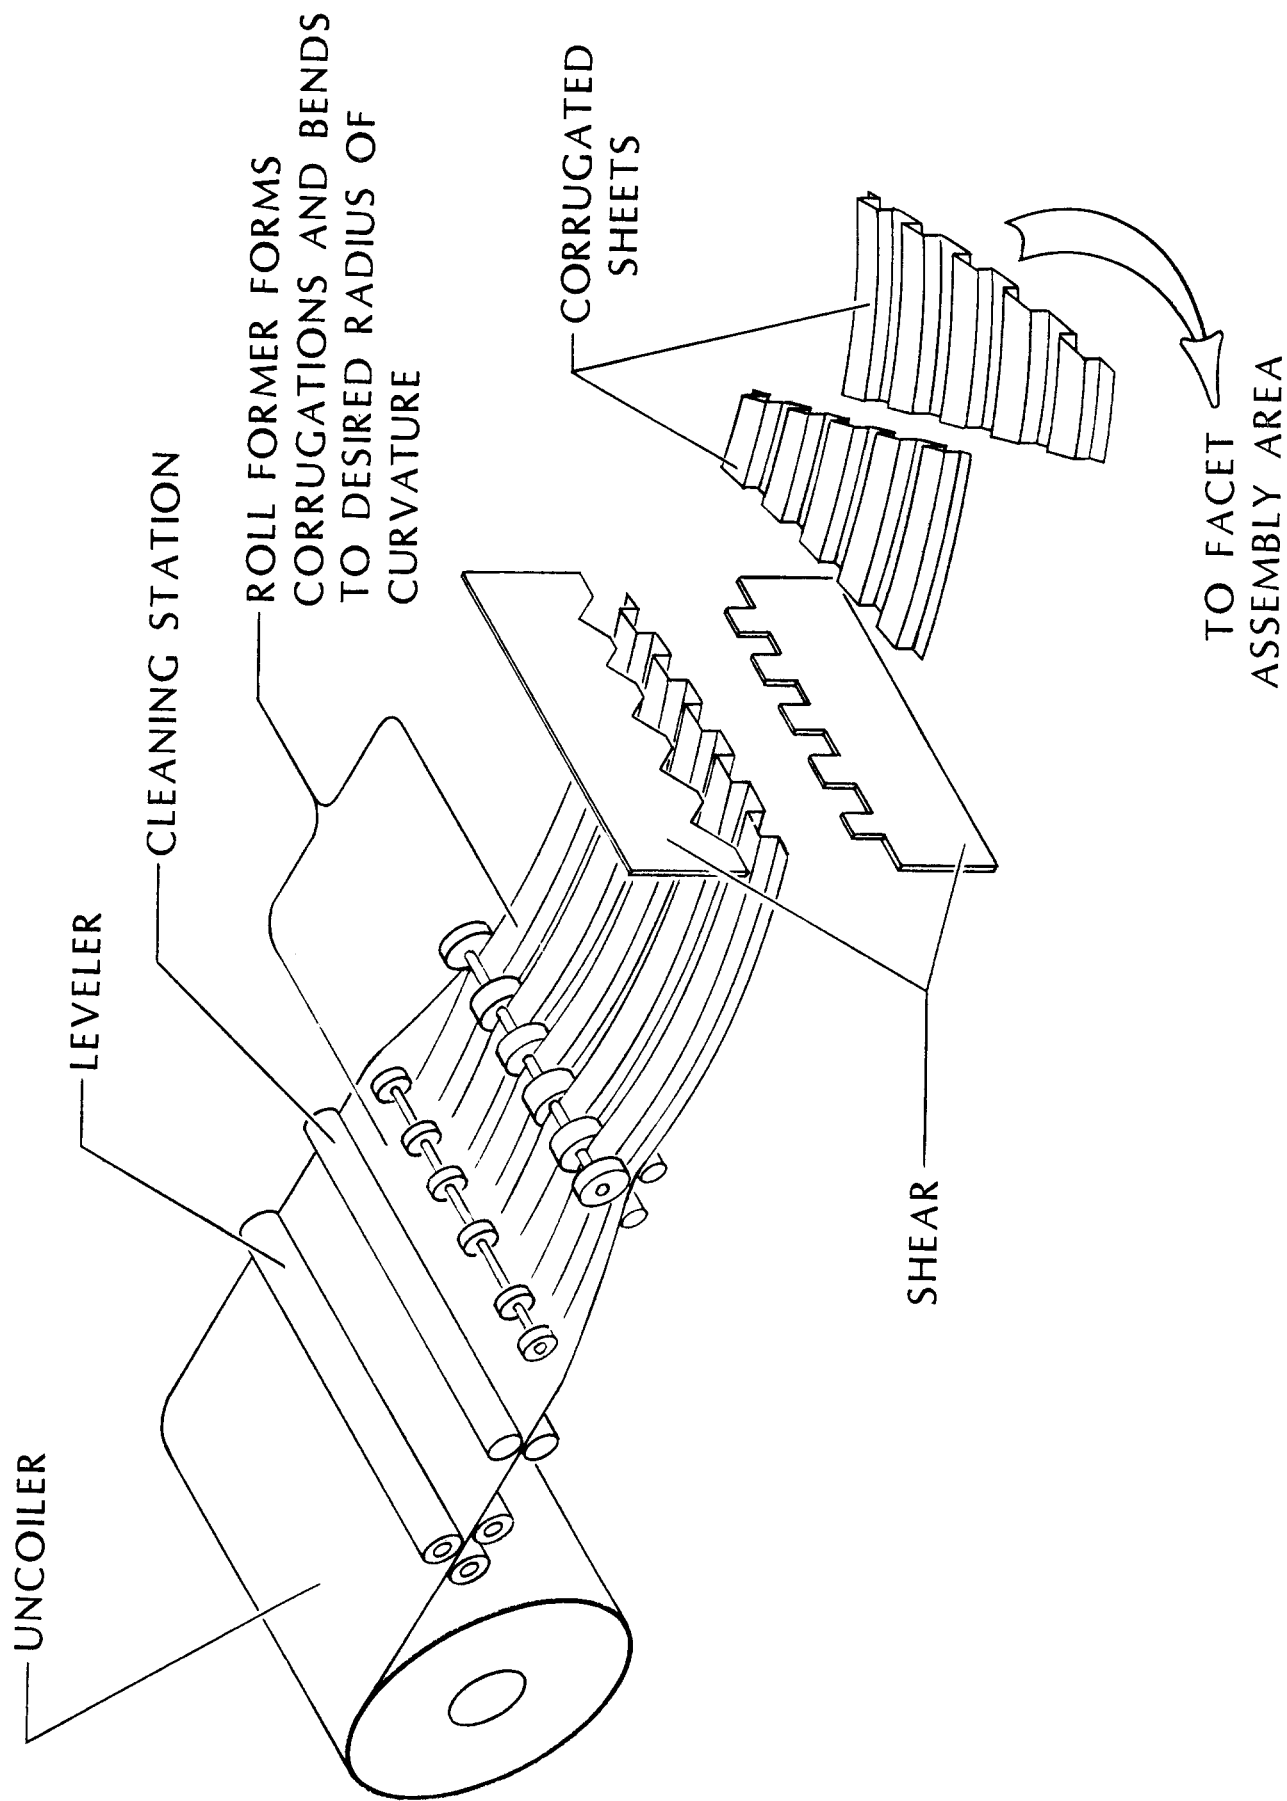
COMMERCIAL OPTICAL ASSEMBLY CORRUGATED SHEET PRODUCTION
